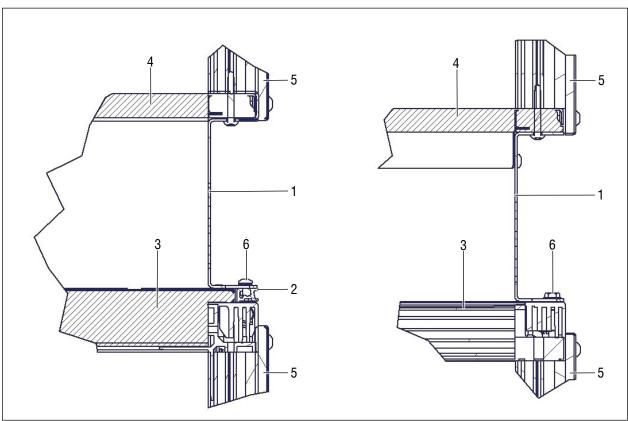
Unit arrangement roof assembly with unit frame profile (left) and without unit frame profile (right)
